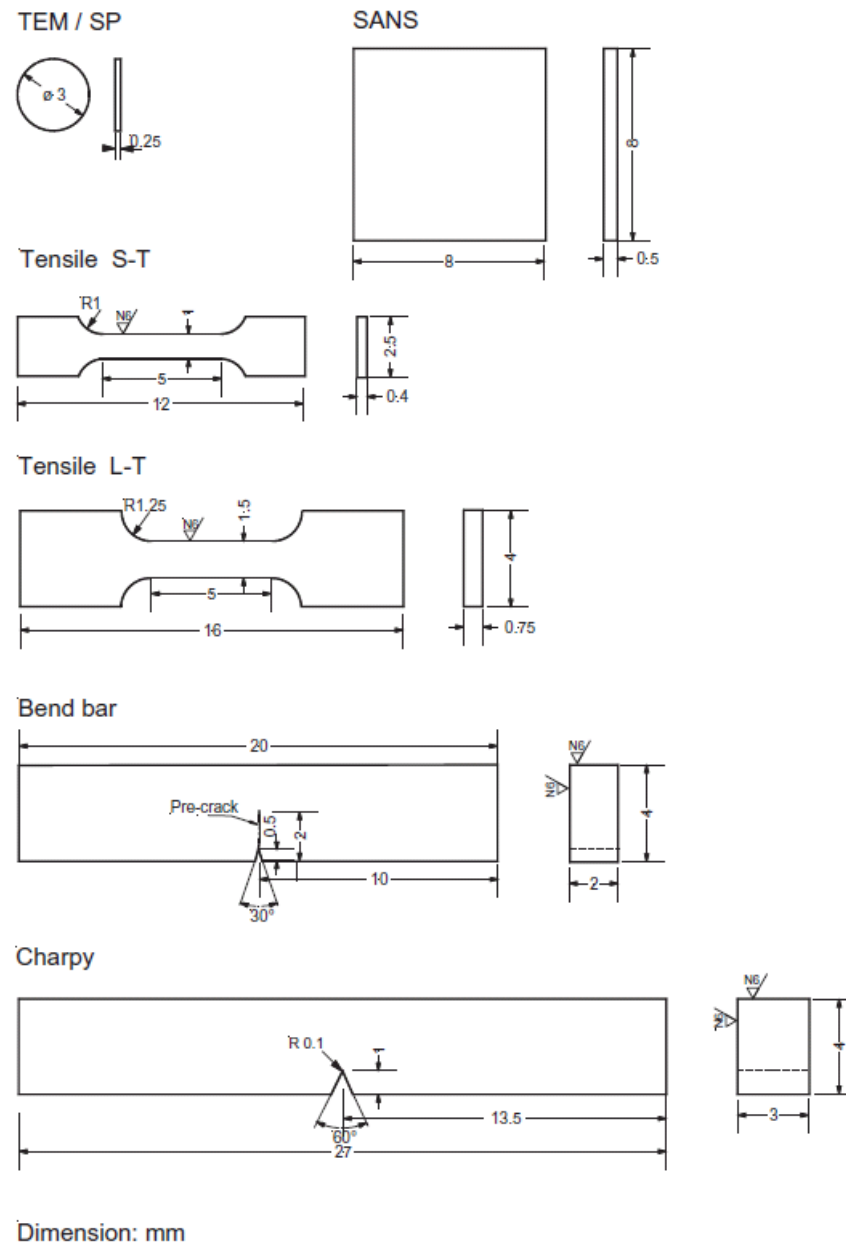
Sketch showing the dimensions of STIP IV specimens [9]
